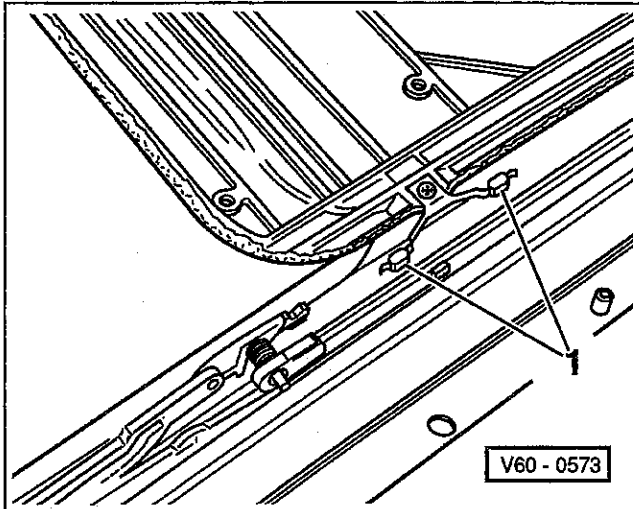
Remove screw that mounts slide (1) (remove from one side only).
